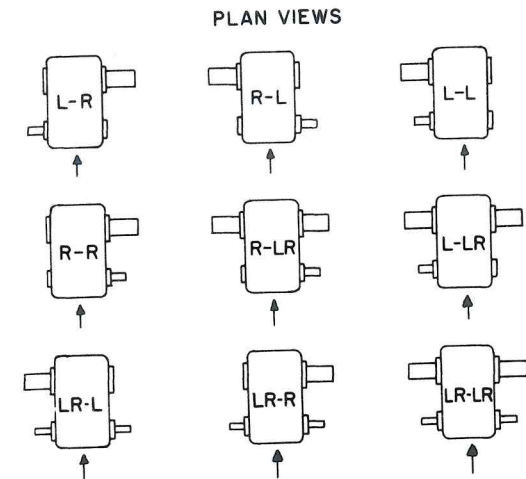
Definition of shaft extensions. Parallel shaft-helical and herringbone gear reducers; single, double, and triple reduction. Code; L = left; R = right; arrows indicate line of sight to determine direction of shaft extensions; letters preceding the hyphen refer to number and direction of highspeed shaft extensions; letters following the hyphen refer to number and direction of low speed shaft extensions. (From Ref. 1.)
